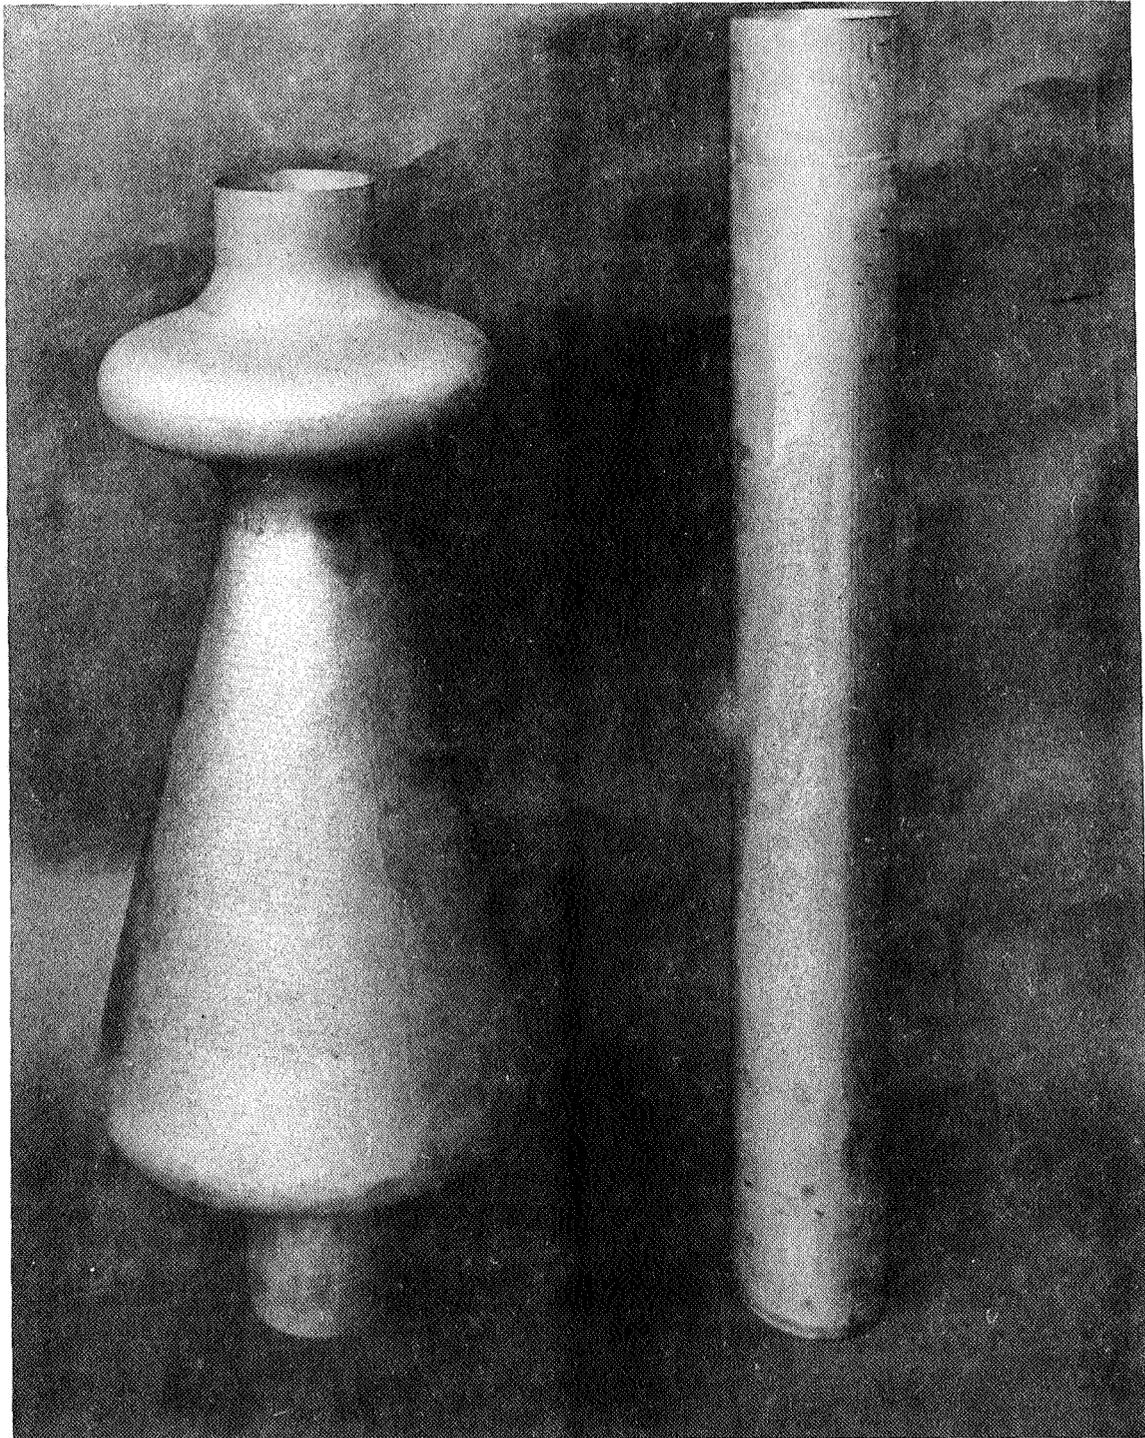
WELDED 4-1/2-INCH-DIAMETER TUBE OF TYPE 321 STAINLESS STEEL HIGH ENERGY FORMED INTO AN EXPERIMENTAL ROCKET NOZZLE WITH A 13-3/4-INCH-DIAMETER SKIRT
